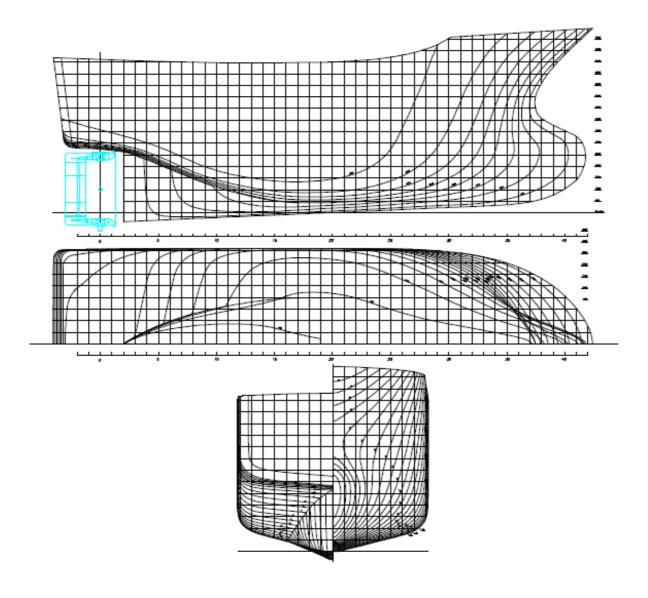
Lines Plan - Design A (Standard whitefish trawler)
